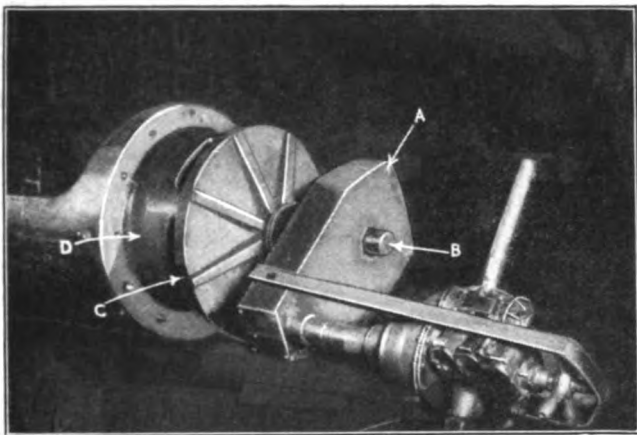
PRESSING-IN A CYLINDER BUSHING
